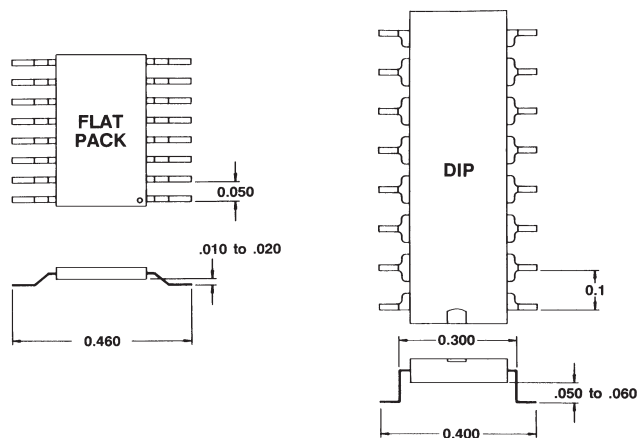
DIP and Flat-pack electronic part packages with leads bent for surface mounting
